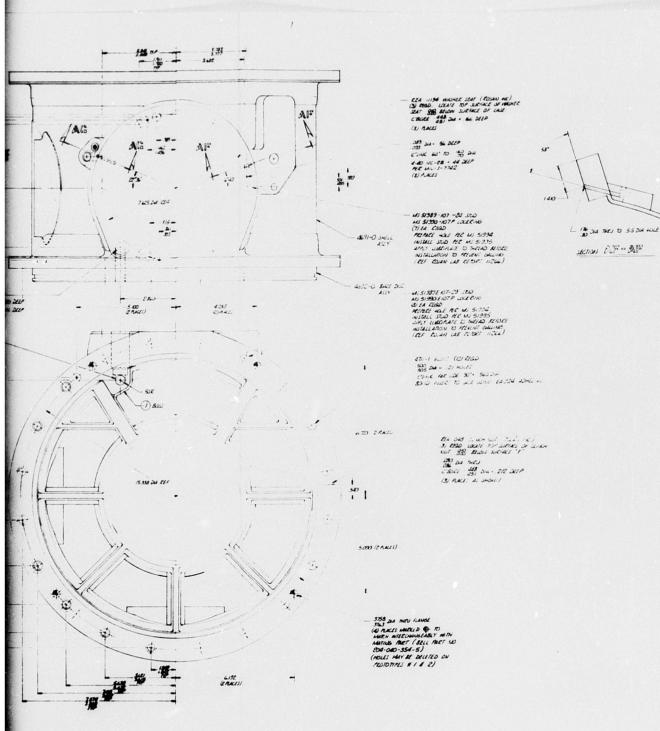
Housing Assembly - Helicopter Transmission, Composite Material (WRD Drawing No. 4690).
